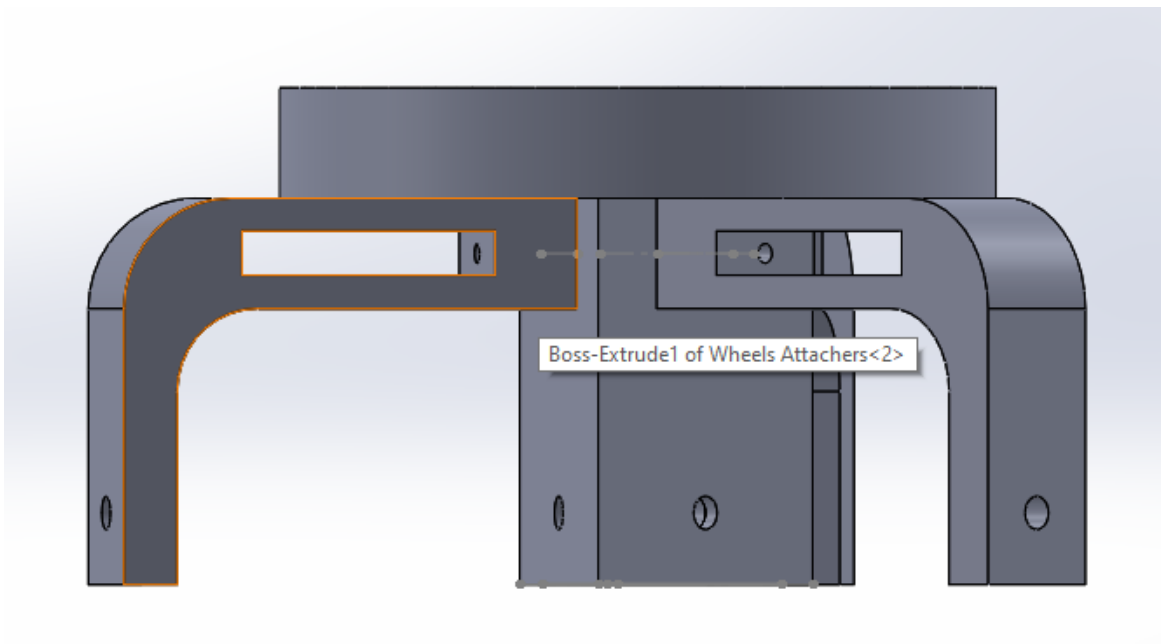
CAD Model of Prototype I without Wheels (Side View)
